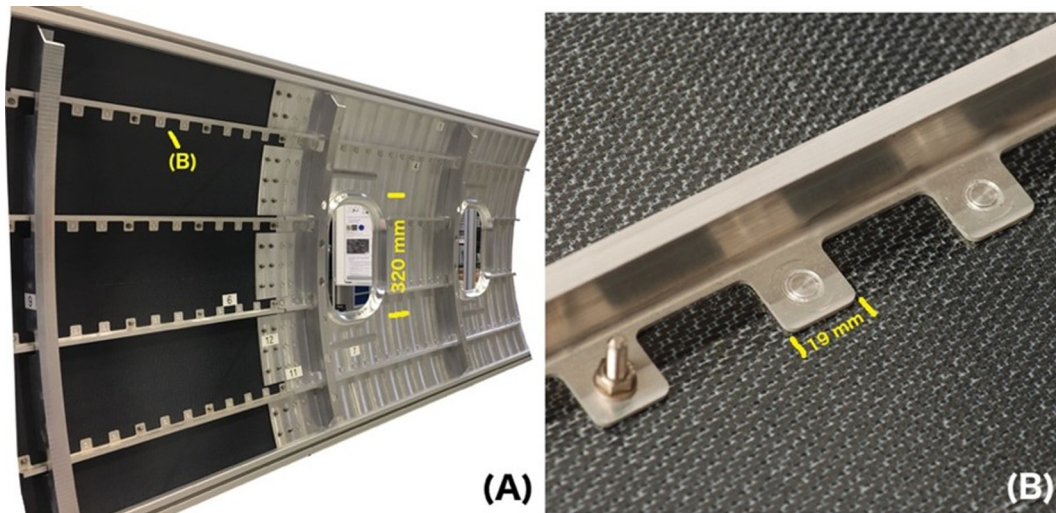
A) Overview of the metal-composite demonstrator produced entirely with friction-based joining technologies at HZG Germany. (B) composite skin-metallic stringer joined by two FSp joints and one friction-riveted joint.
